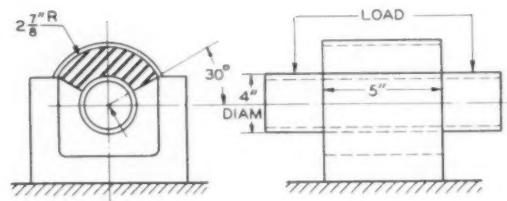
LOADING OF A SECTION OF A RUBBER BUSHING IN TENSION
